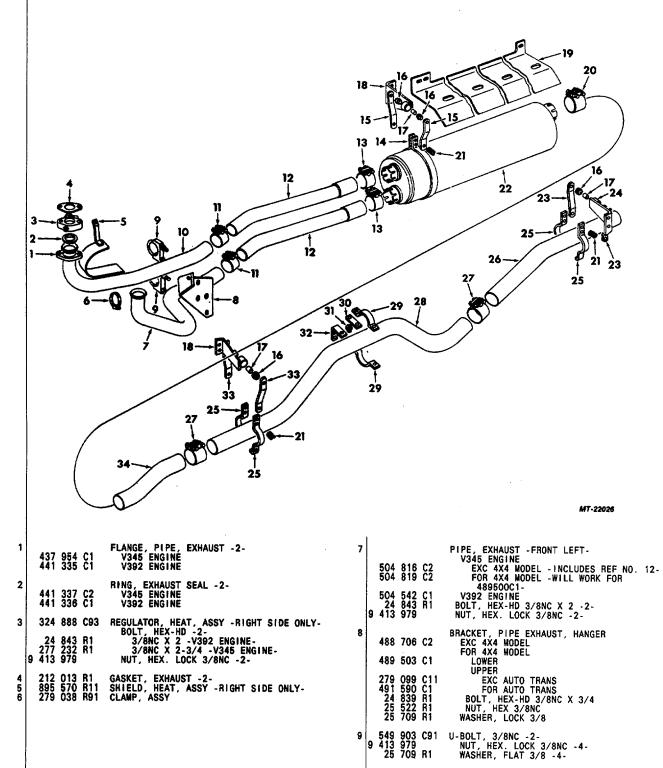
MUFFLER, EXHAUST PIPE, TAIL PIPE
